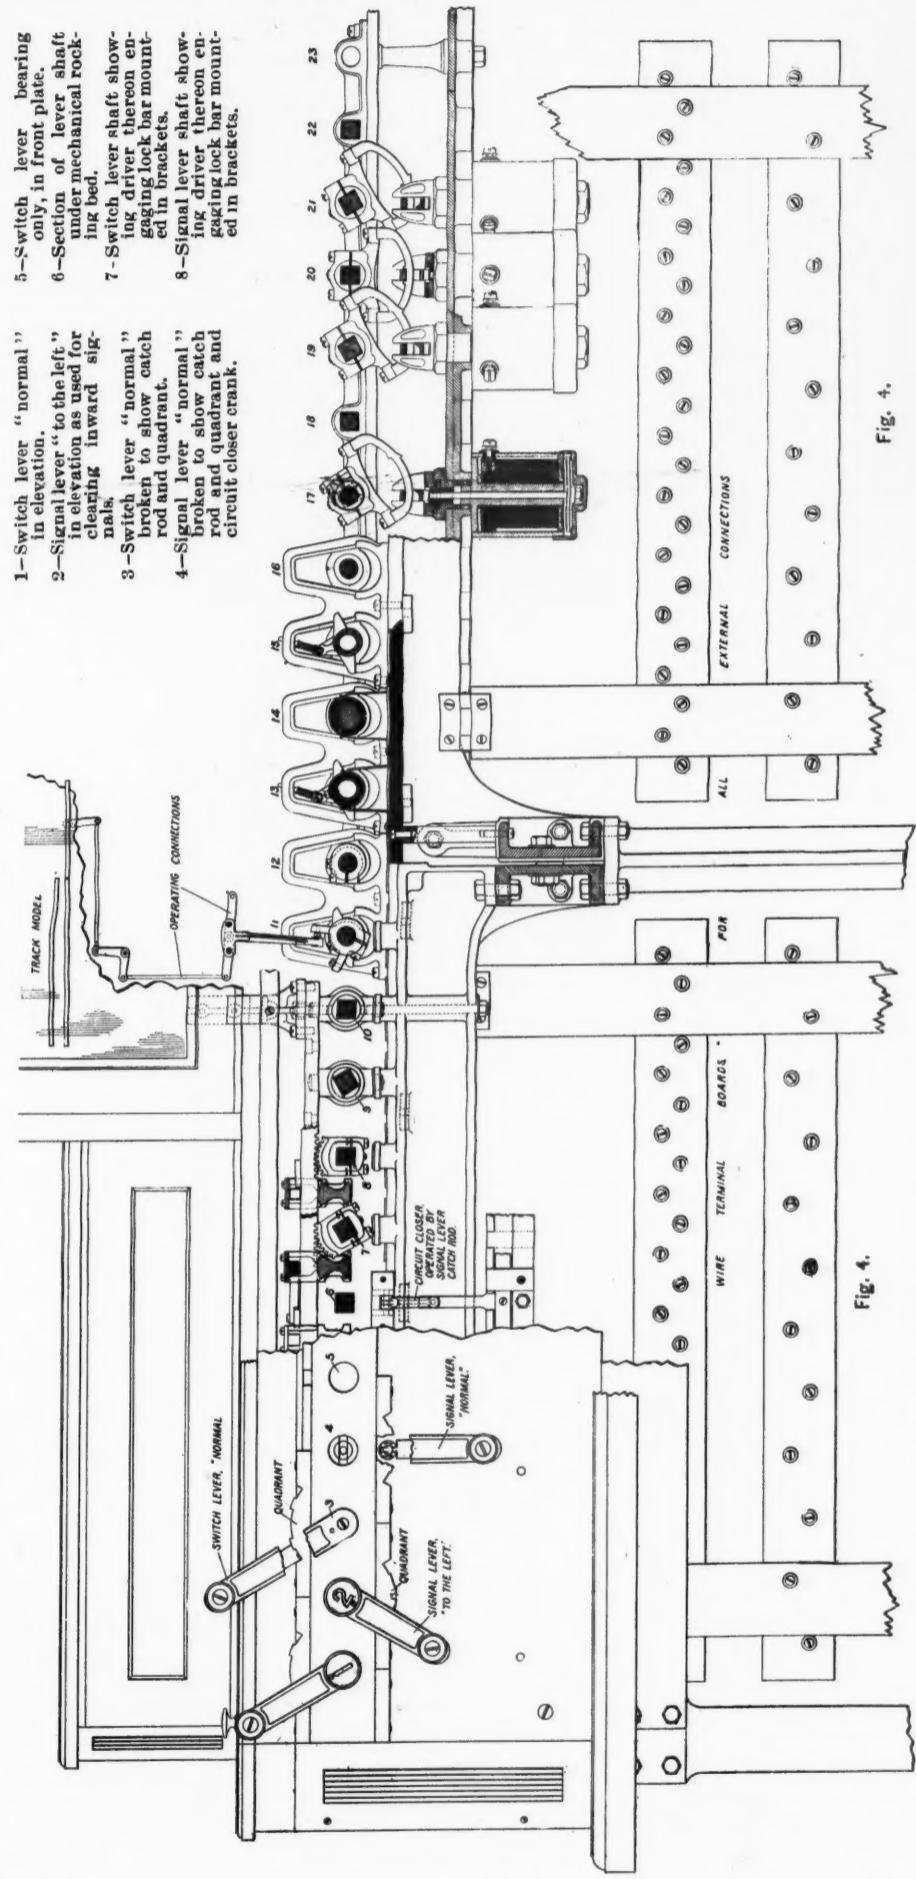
SECTIONAL VIEW OF MACHINE ON CENTER LINE OF SIGNAL LEVER.
